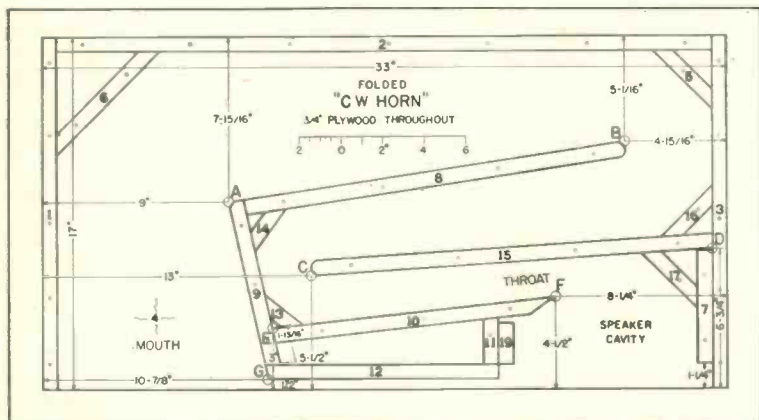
Assembly of the horn, with pieces numbered in accordance with Fig. 5. Layout dimensions are shown.
